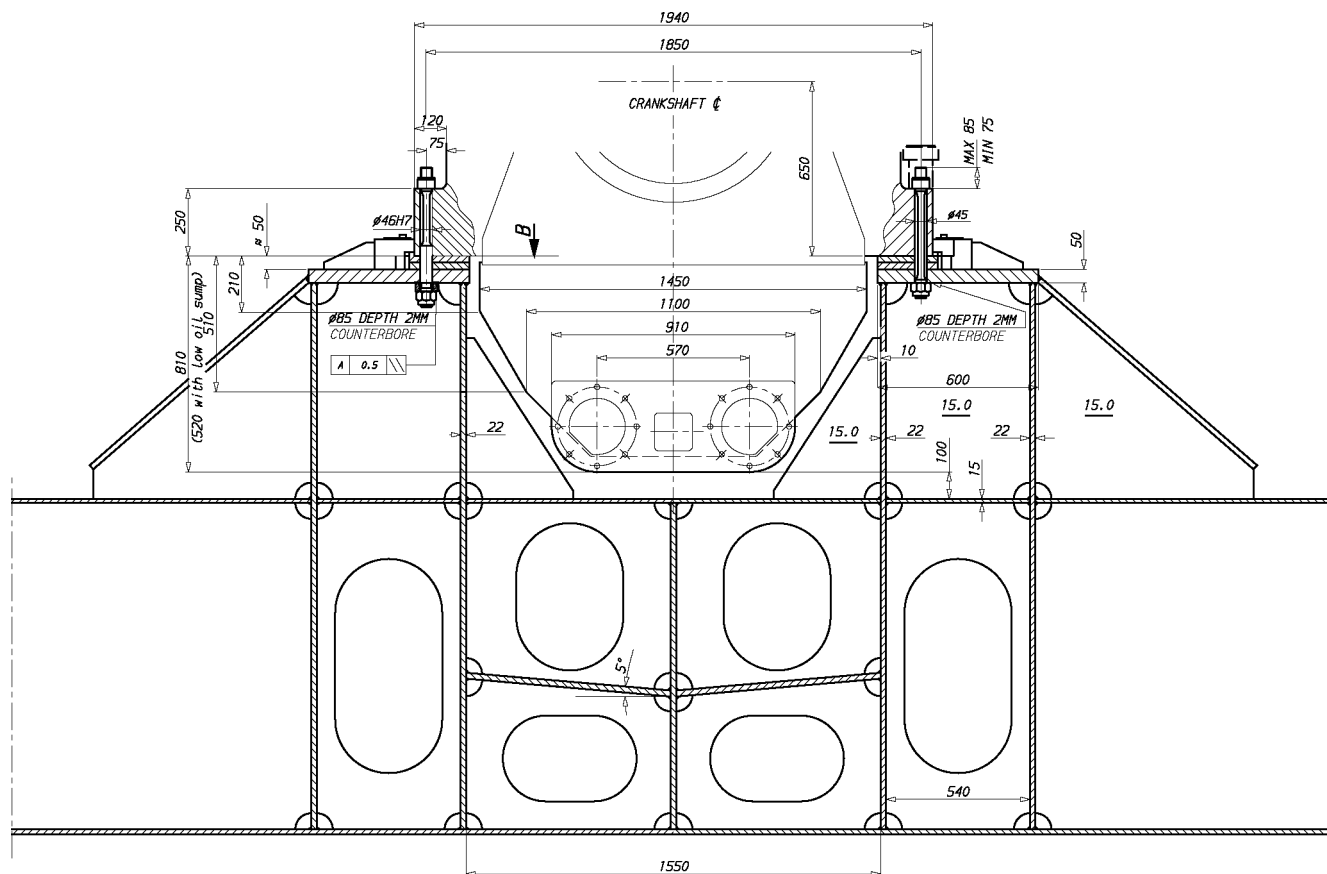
Seating and fastening, rigidly mounted V-engine on steel chocks (1V69L1659a)
